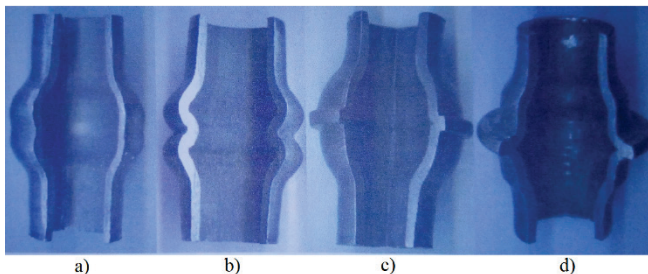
Defects occurred in forming tubular workpieces without chemical surface preparation
